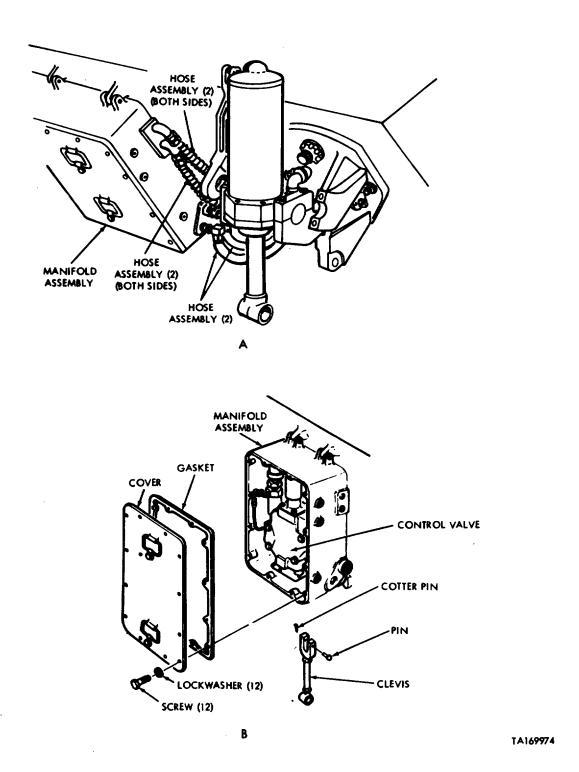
Removal or installation of manifold assembly (sheet 1 of 2).
